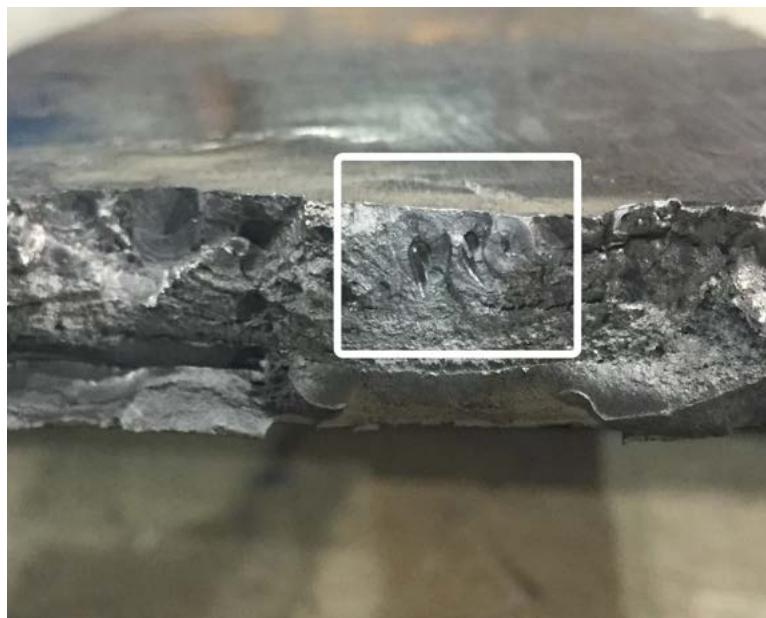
Hydrogen embrittlement of a welded coupon.
